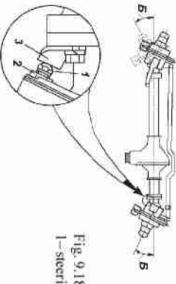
Adjustment of Wheels Steering Angle: 1—steering stop bolt; 2—locknut; 3—steering stop
